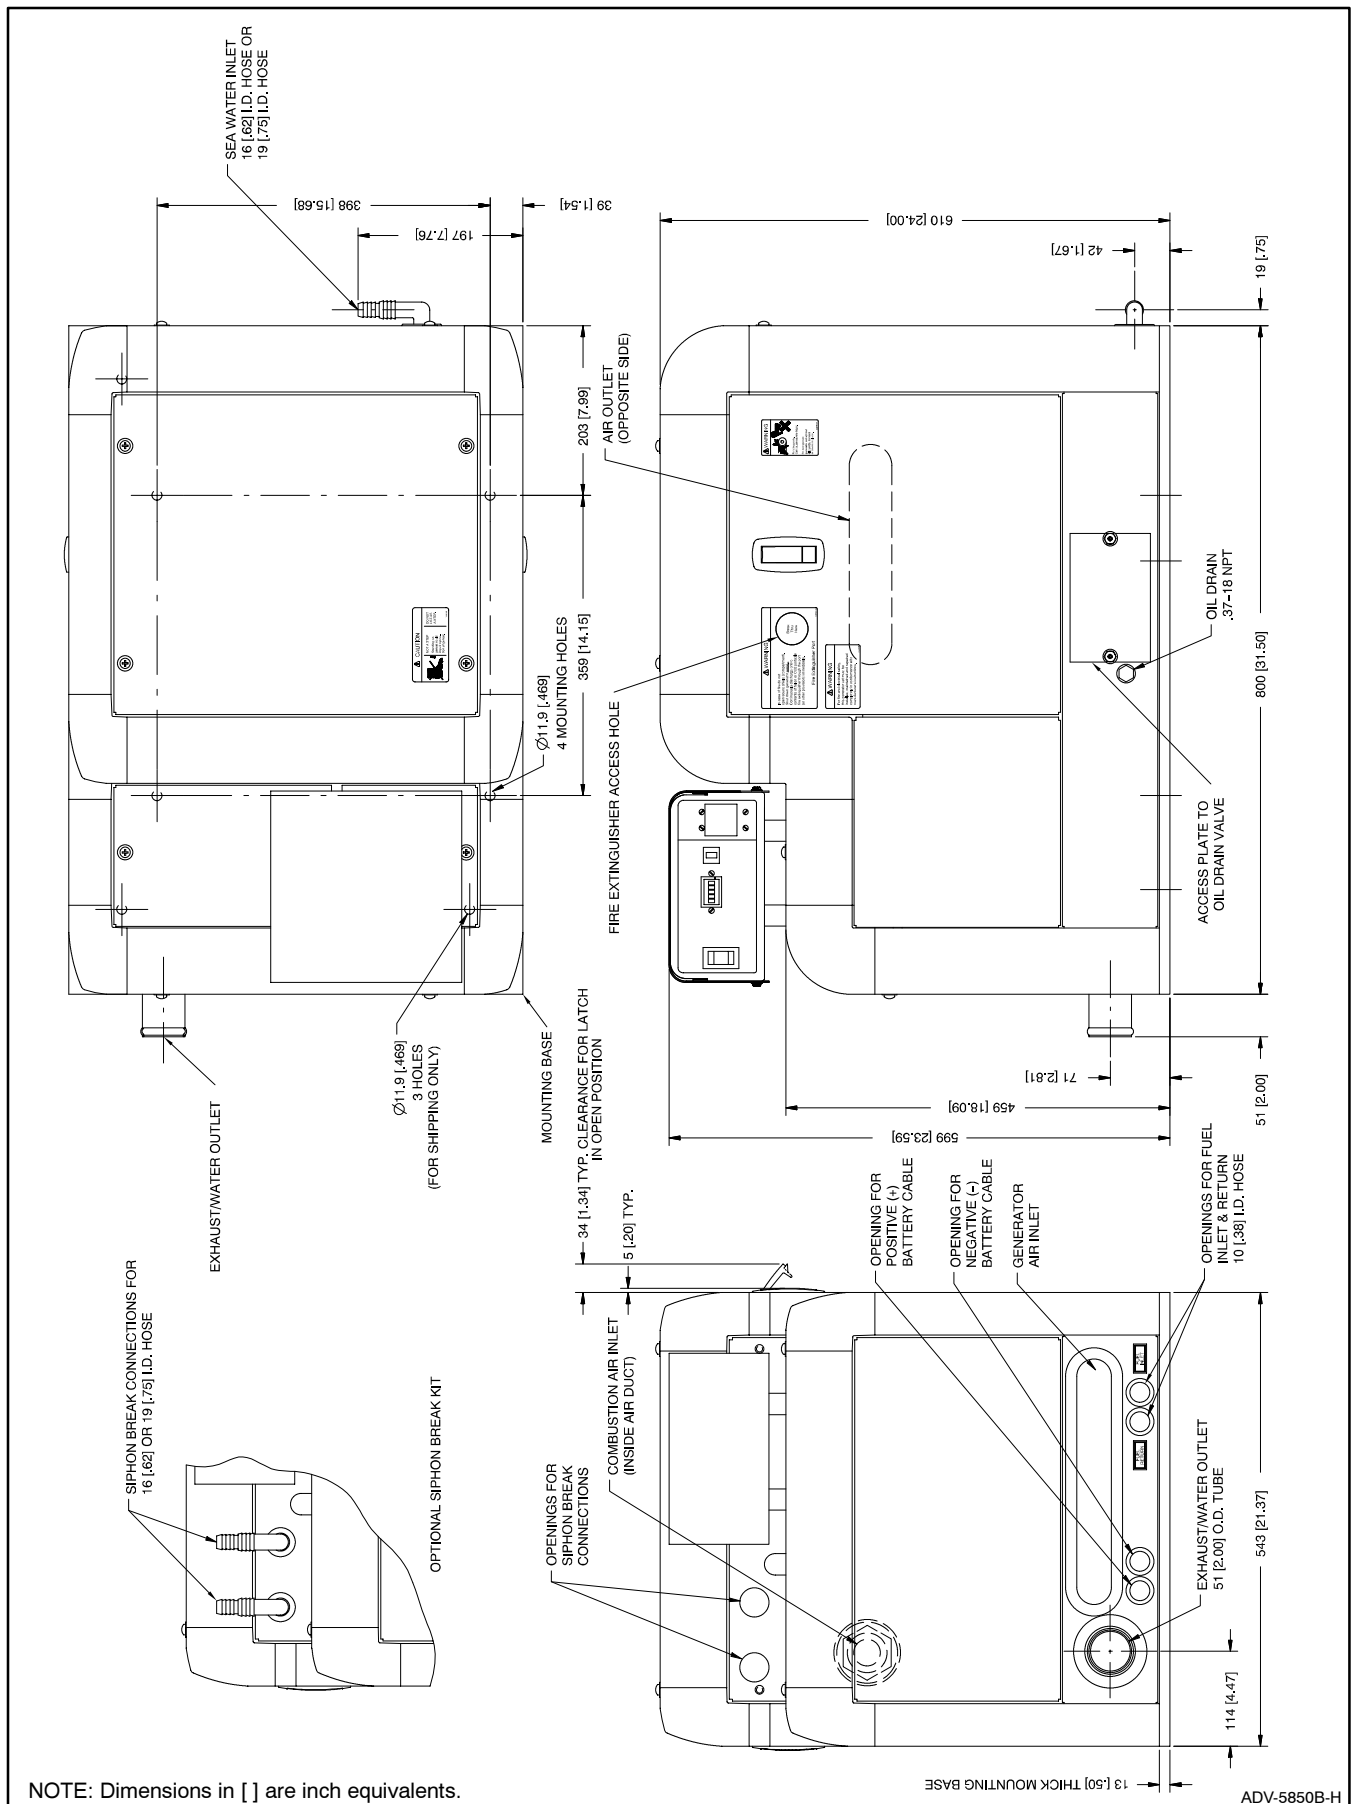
Dimension Drawing, 4EFOZ/5EOZ with Sound Shield
